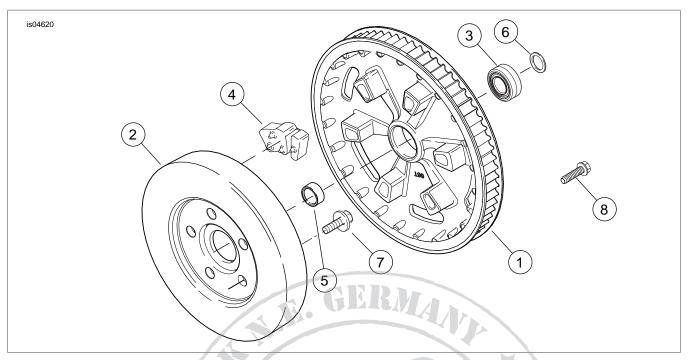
Service Parts: Touring Rear Sprocket Compensator Kit (40287-07)
